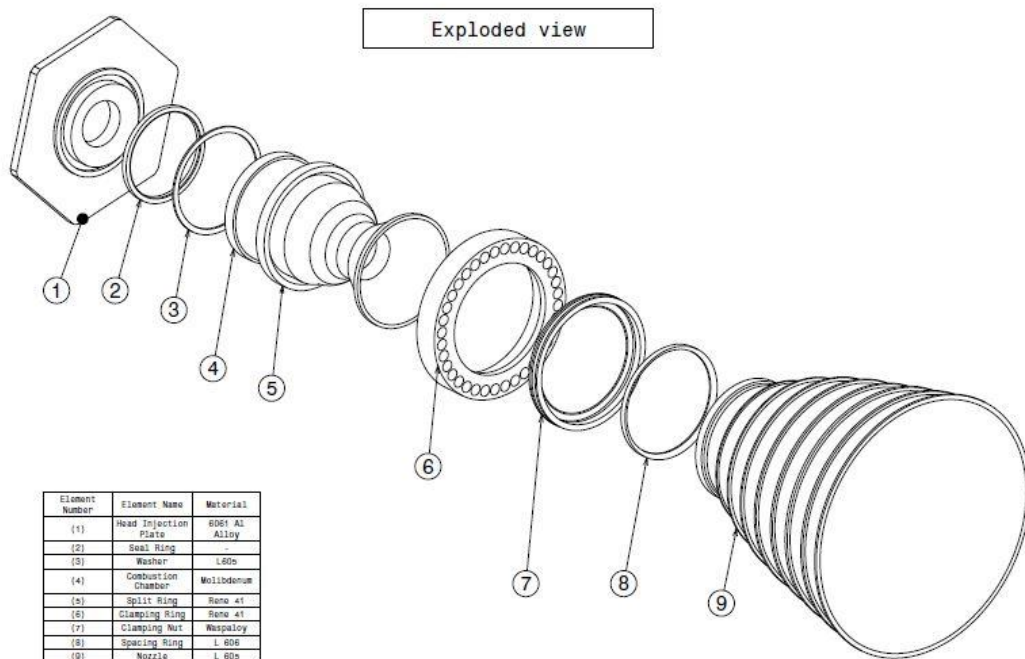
Exploded view of rocket engine designed by Solid Works
